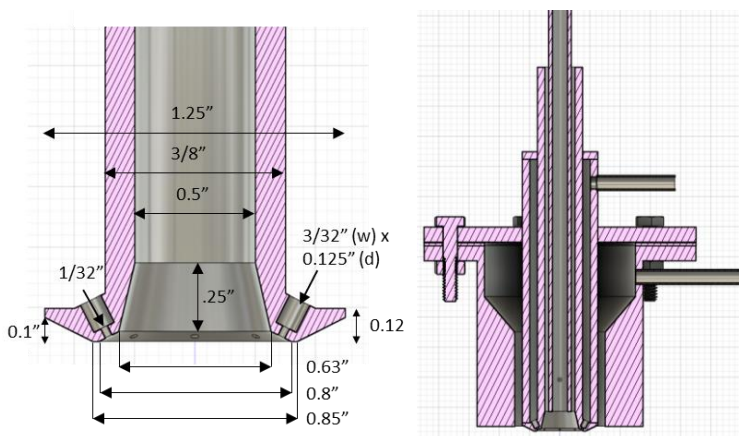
Schematic drawing of the burner. The inner body (left) and the fully assembled burner with mated flange (right).
